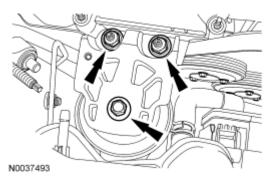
Locating Engine Mount Bracket Bolt And Nuts Courtesy of FORD MOTOR CO.
